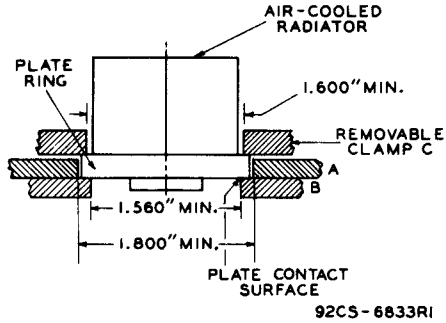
Mounting Arrangement for Use with Coaxial-Line or Cavity Circuits.
